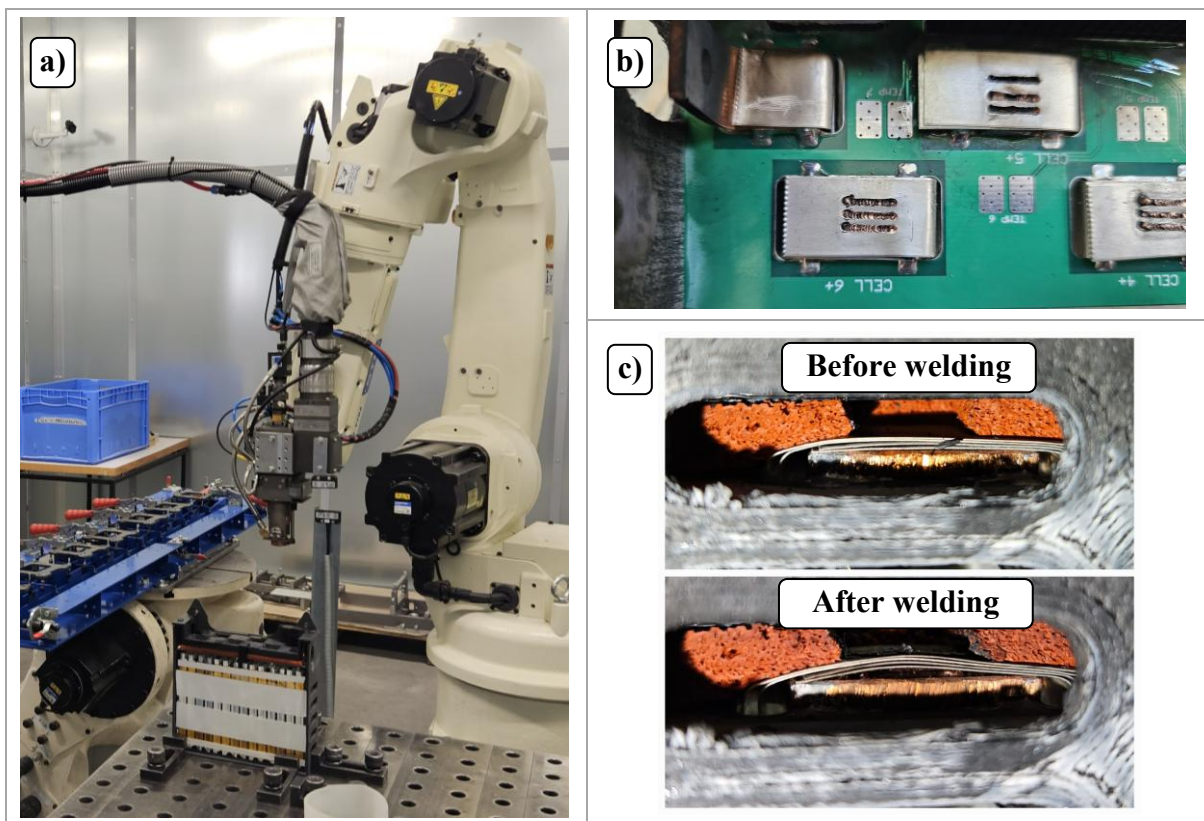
Laser welding details – a) welding setup, b) completed welds, c) contact lifting
